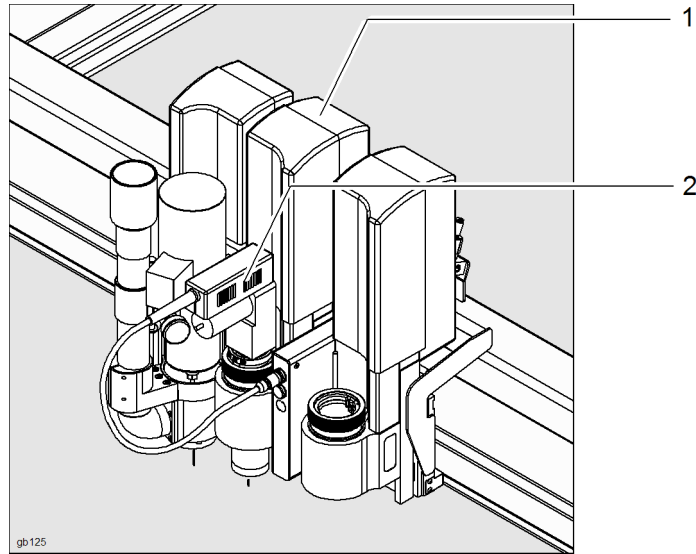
Tool slot, tool assignment e.g. Module 2, tool 1
